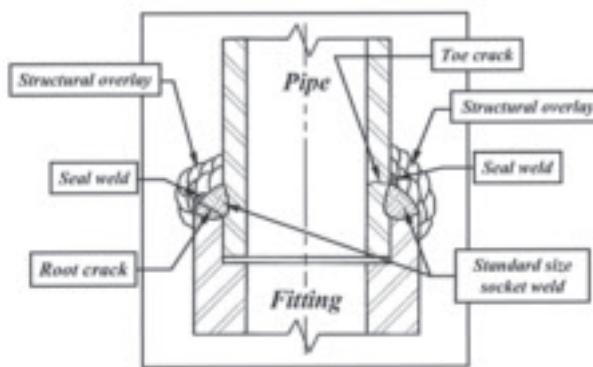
This cross-sectional view illustrates the overlay weld process for both a root and toe crack. A crack is first peened, then seal welded, and the overlay weld metal installed.
